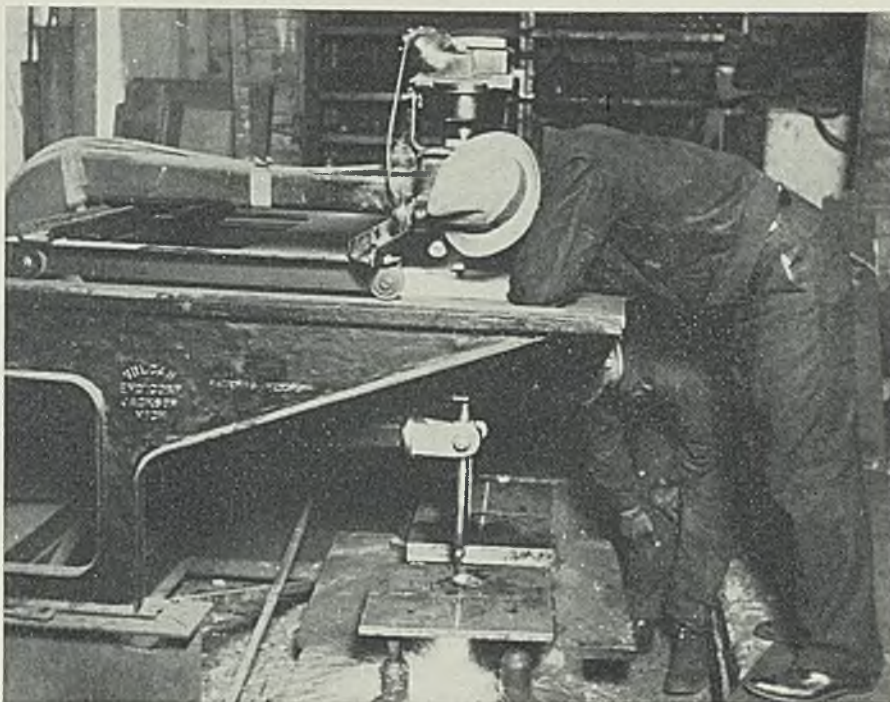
Flame cutting machine, with torch below main table on which operator traces pattern to be cut, this movement being translated to the torch in direct proportion
